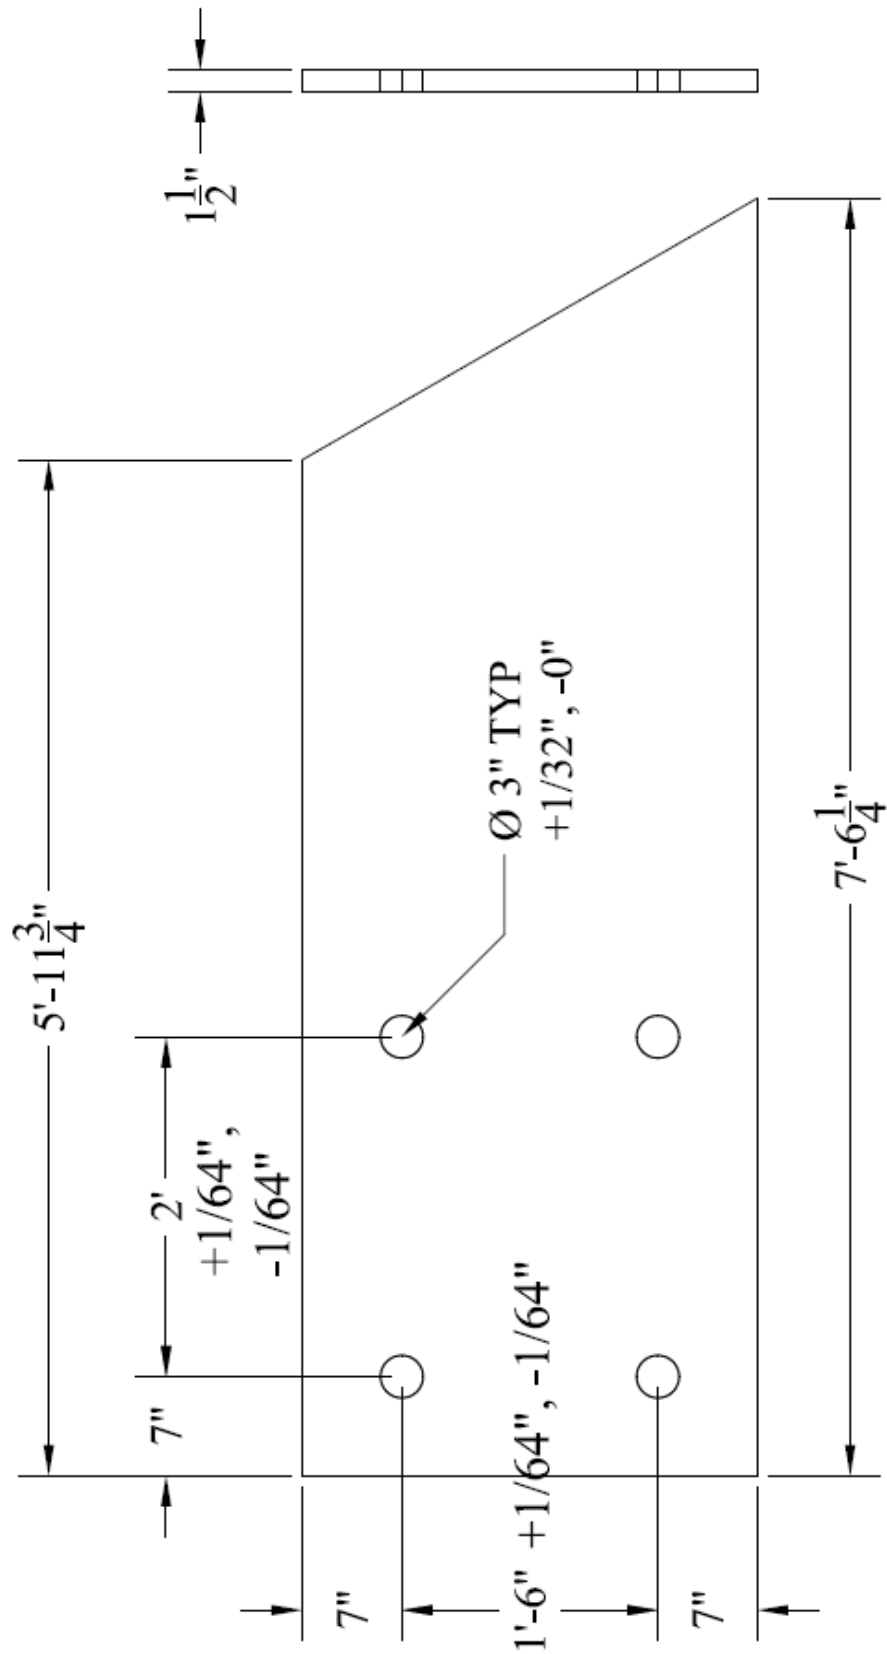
Loading Frame p1001 (1 in. = 25.4 mm)
